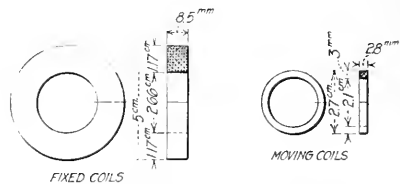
DETAILED DIMENSIONS OF COILS USED IN ELECTRODYNAMOMETER
